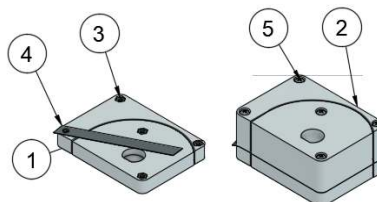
Variation 1 components. 1. Bottom part, 2. top part, 3. hexnut, 4. cutterblade, 5. screw.
